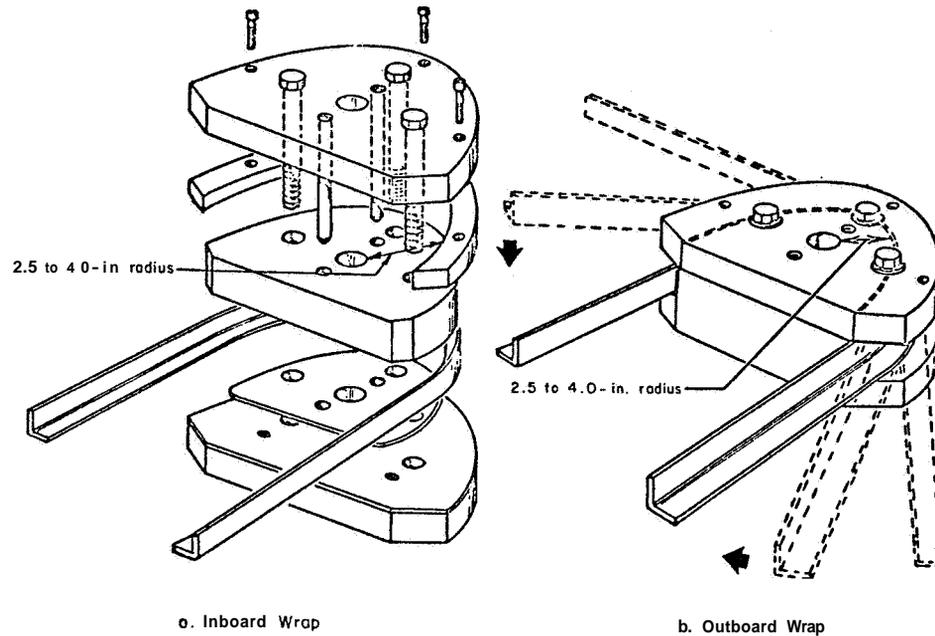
STRETCH-MACHINE (ANGLE SECTIONS) TOOLS
